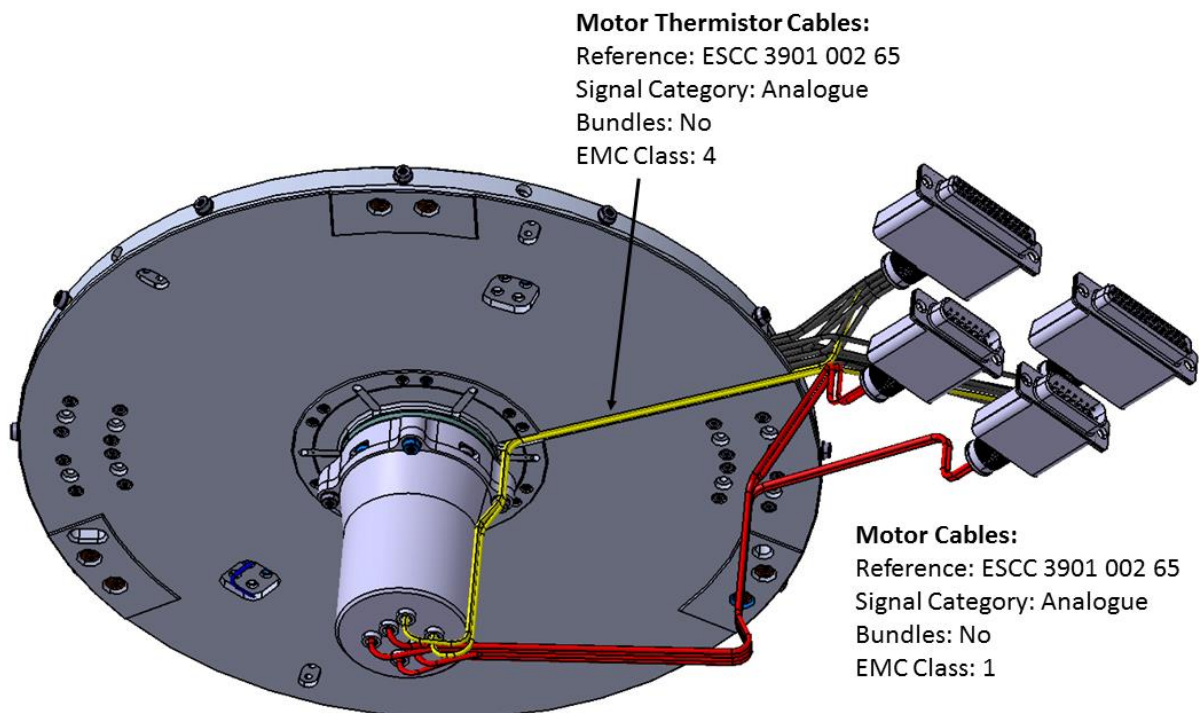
Motor (red) and Motor thermistor (yellow) cables routing and description
